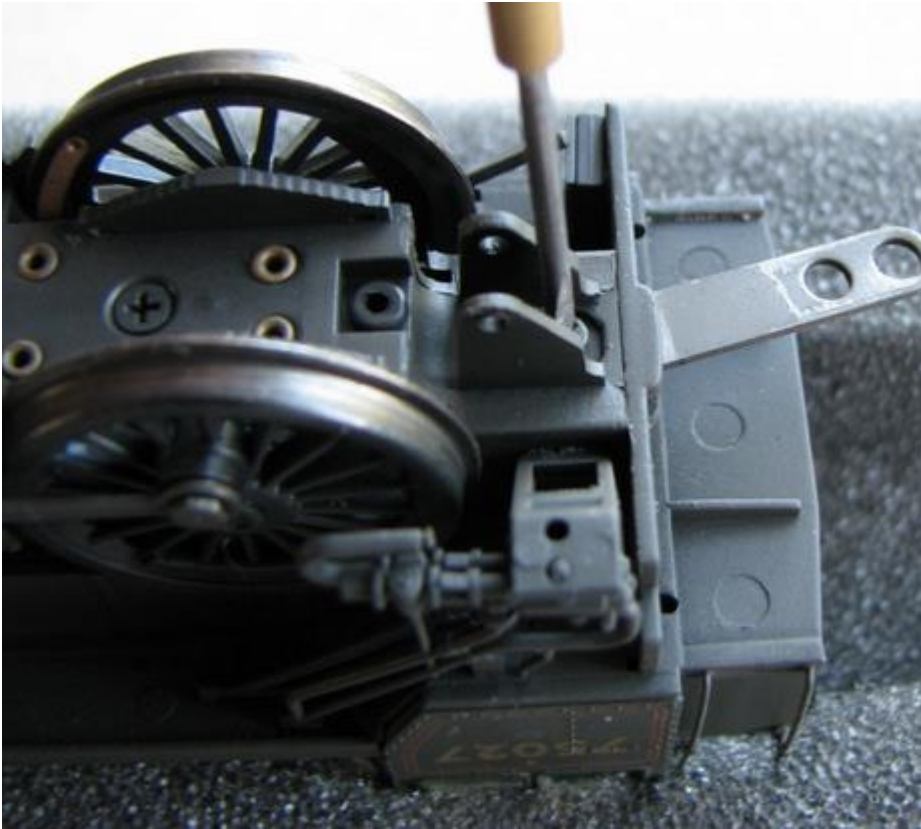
the rear screw is under the cab, and also retains the tender coupling bar.
